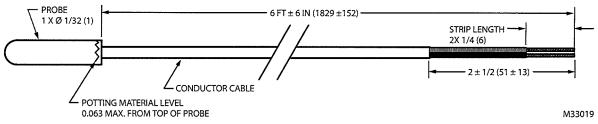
C7021K, C7023K, C7041K dimensions in in. (mm).
